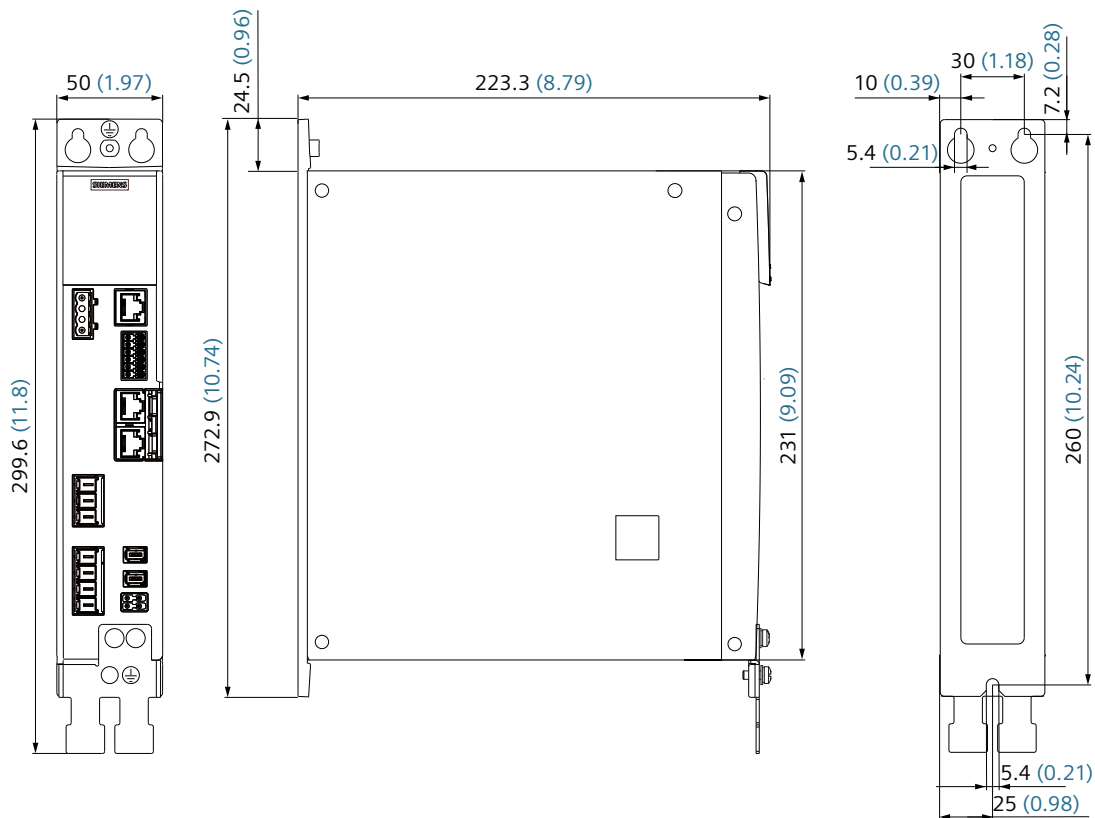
Dimension drawing SINAMICS S210 FSA, 3 AC, dimensions in mm (inch)
